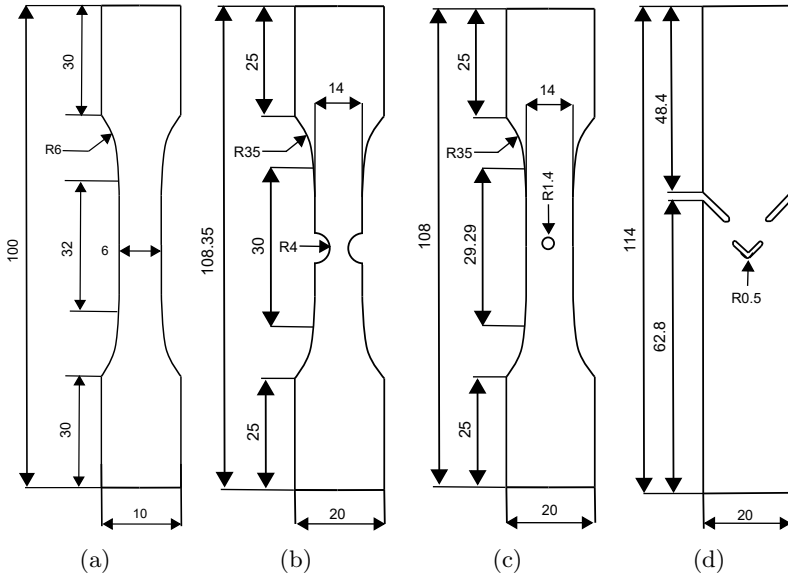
Schematic of specimen geometries for (a) UT (b) NT (c) CH (d) SH specimens. (All dimensions are in mm)
